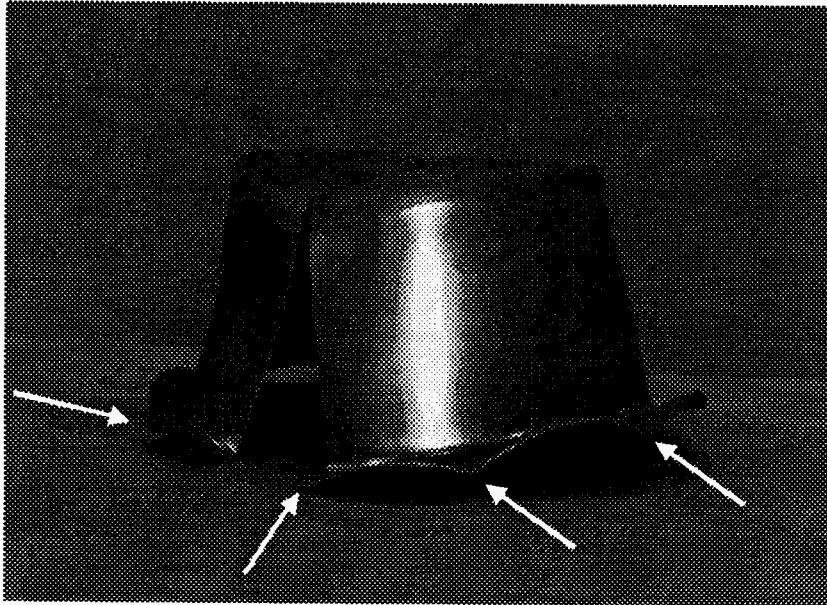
Flanged cup using a draw ratio of 2.0 showing bending of the flange as indicated by the arrows
